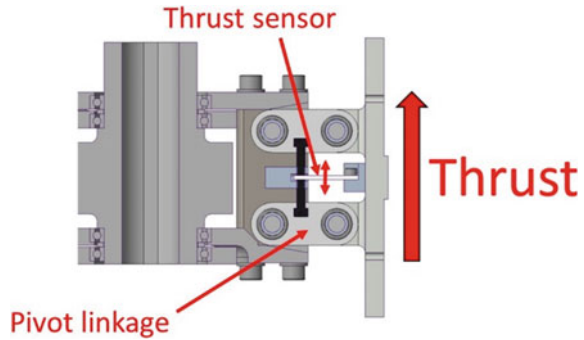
Blade load measurement hub, Thrust mechanism cross-section
